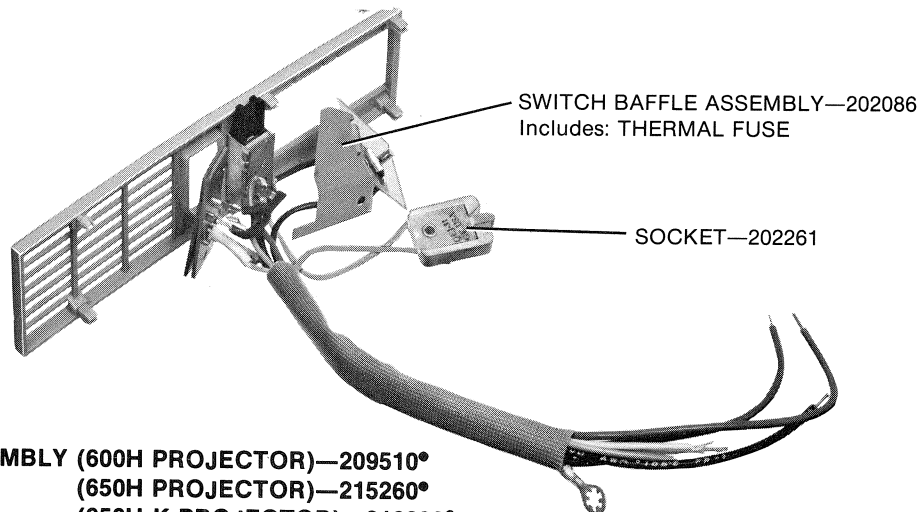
GRILLE ASSEMBLY (600H PROJECTOR)—209510
